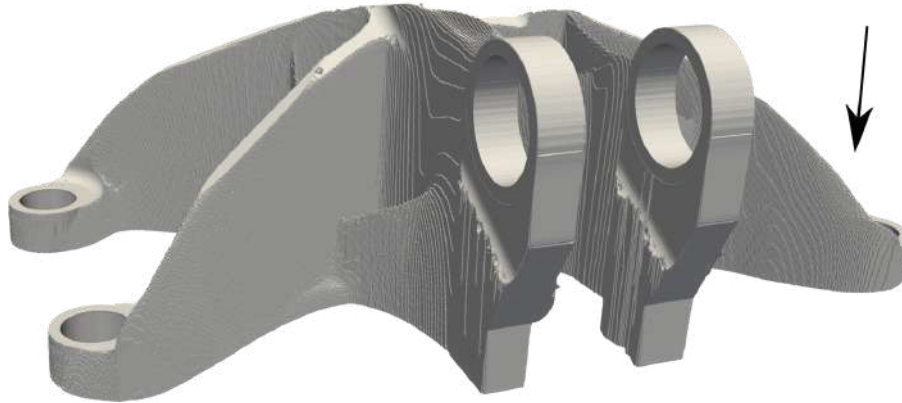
Optimized GE engine bracket, manufacturable with a single milling direction from the top, indicated by the arrow.
